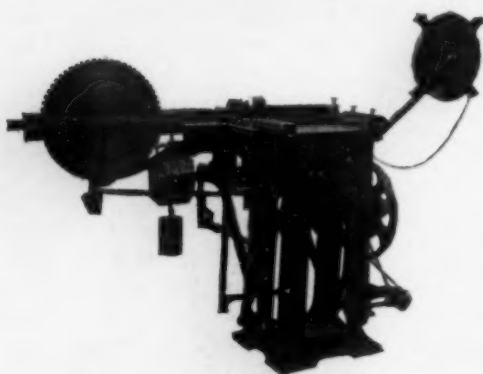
Machine for automatic drilling of holes and setting bristles.
